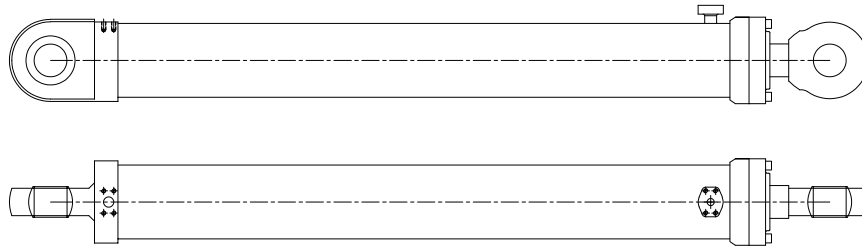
Mechanical assembly of the hydraulic cylinder for boom and arm.
